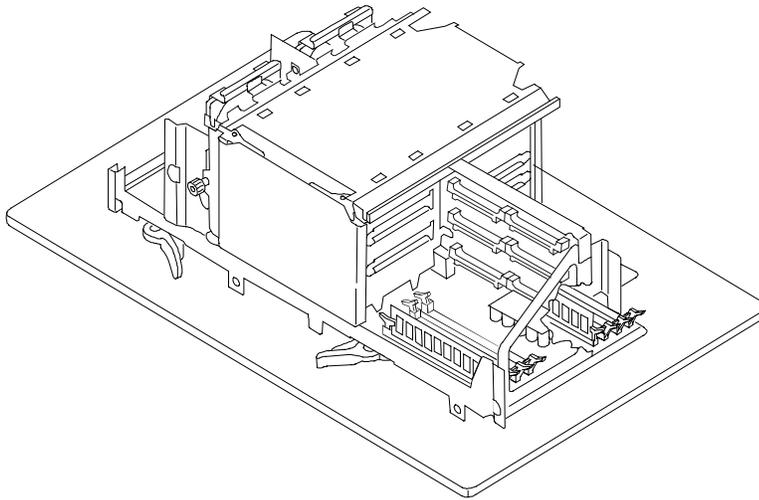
System Board Assembly on Grounded Anti-static pad
